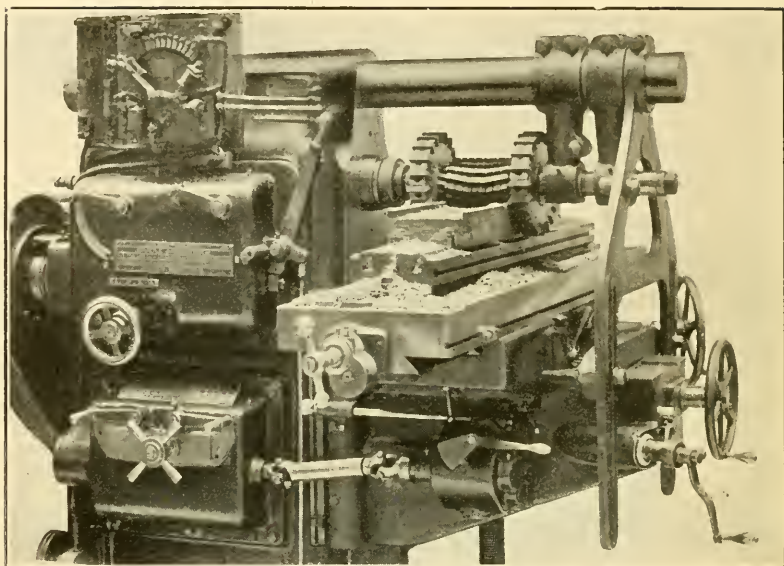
WIDE-SPACE GANG ROUGHING VISE HOUSINGS
